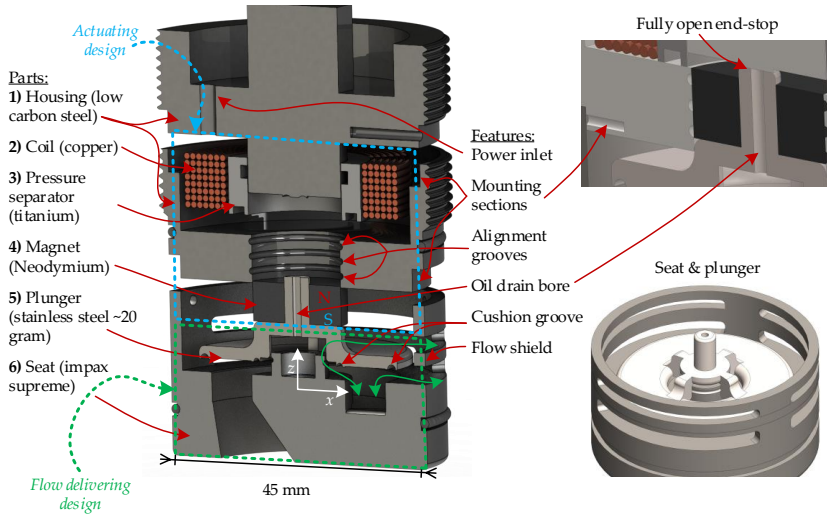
Isometric exploded cross-sectional view revealing the proposed MMVi.1 design. A close-up view of the end-stop mechanism of a fully open valve is displayed. The seat & plunger are shown from another perspective to clarify the design.
